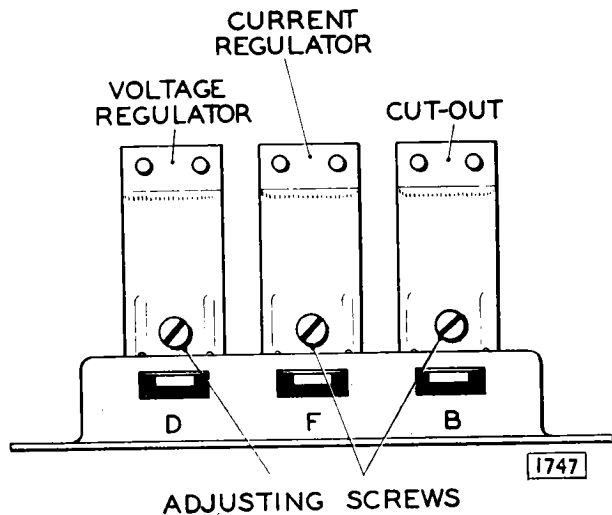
The RB.310 control box showing the position of the three spring loaded adjusting screws.
